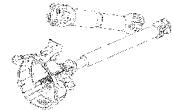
Clutch shaft c/w bushing and cover - disassembly
